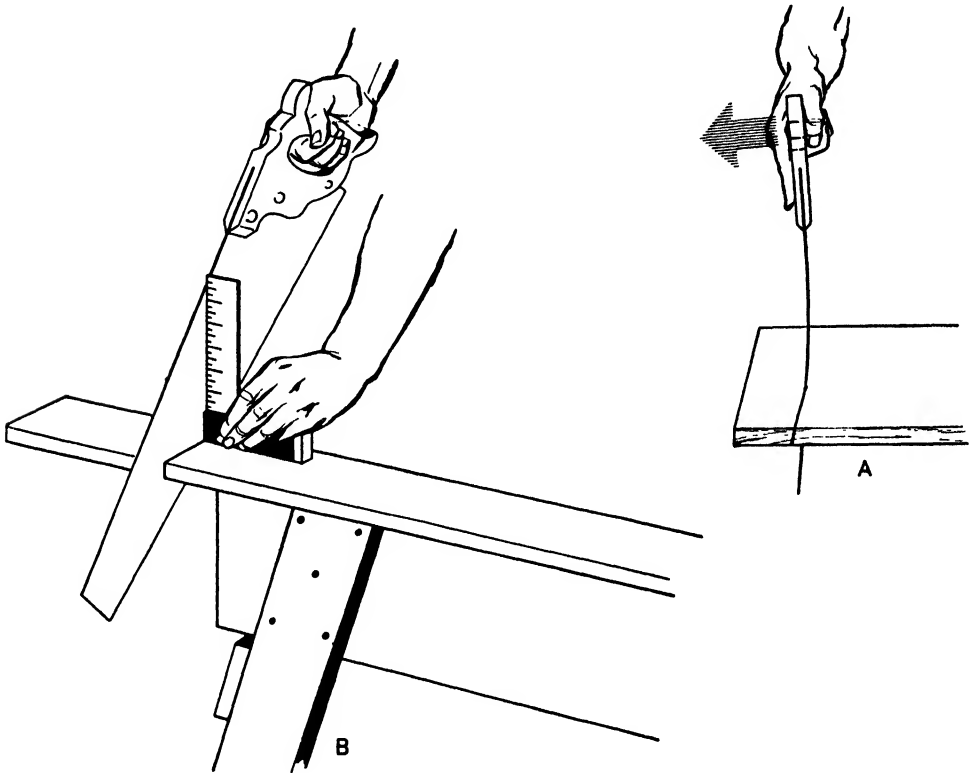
It is best for the beginner to check his work occasionally to see that he is making a square cut. If he is not, he should bend the saw a little, as shown at A, to straighten the cut as the sawing proceeds.
